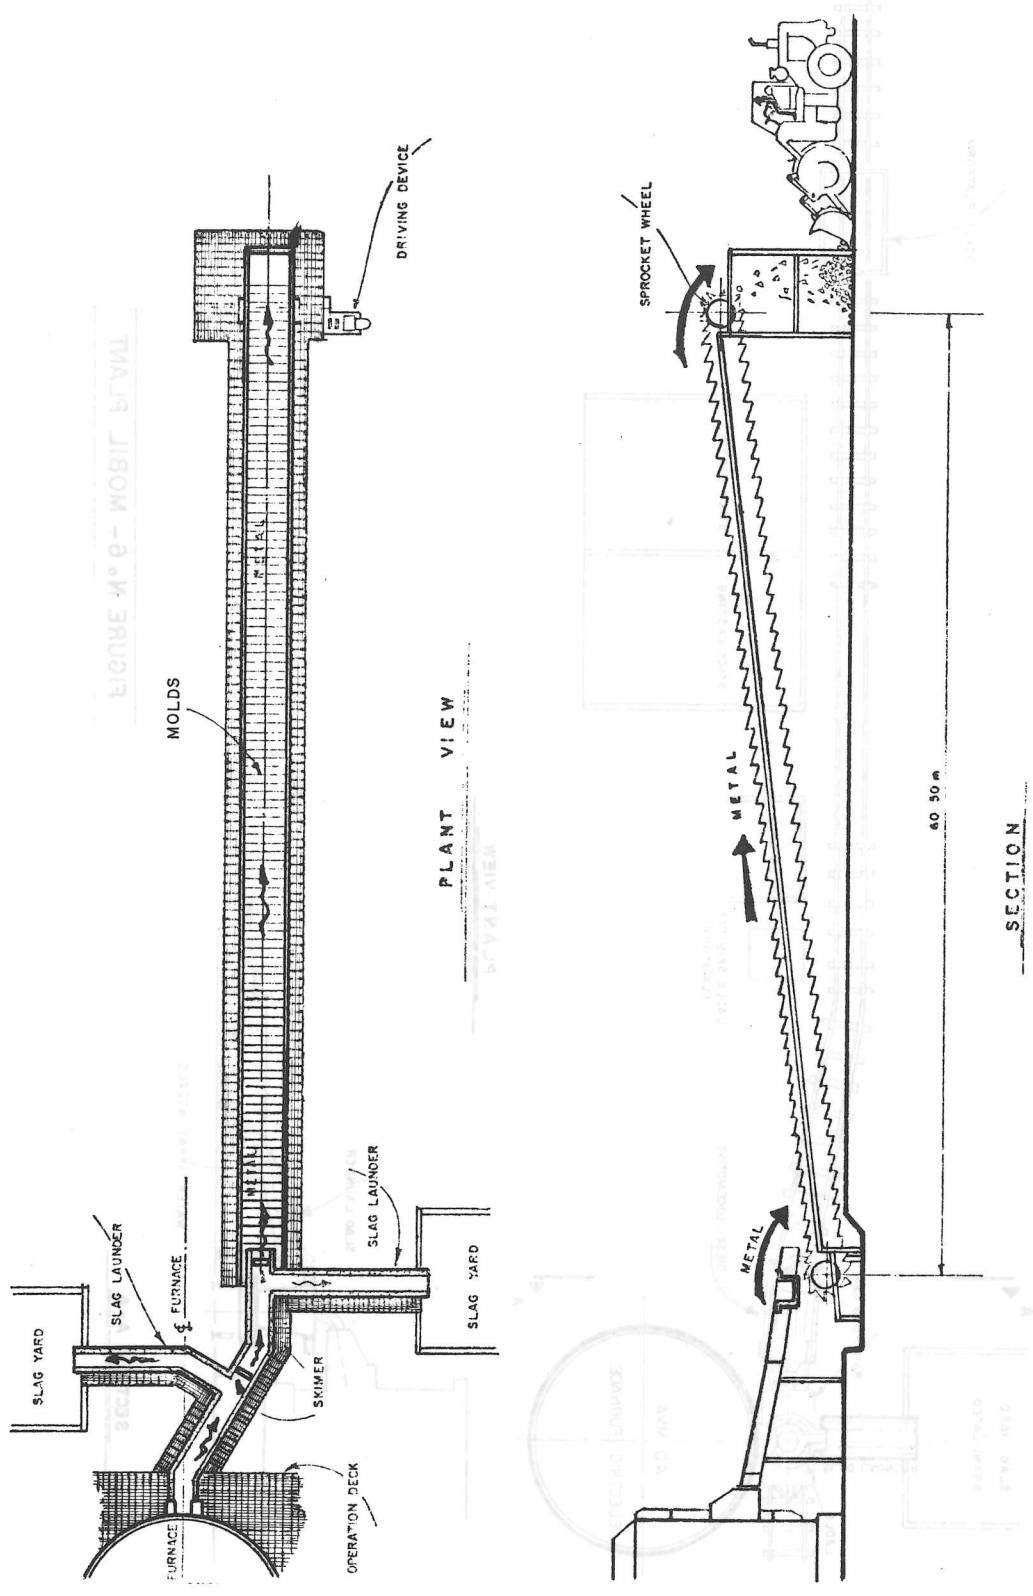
TAPPING WITH SKIMER AND CASTING MACHINE (MIZUSHIMA) .
